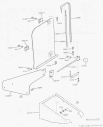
EXPLODED VIEW OF THE MECHANICAL ASSEMBLY
